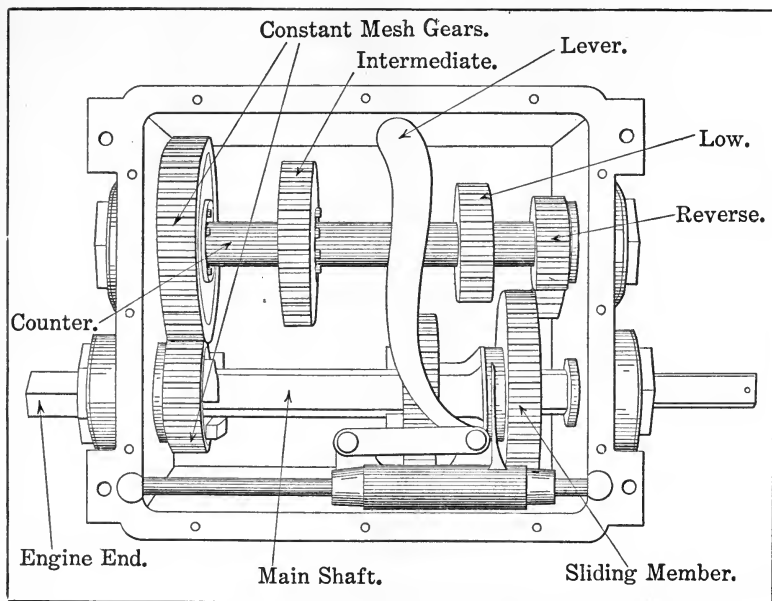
Arrangement of Gears in Progressive Sliding Gearset.
